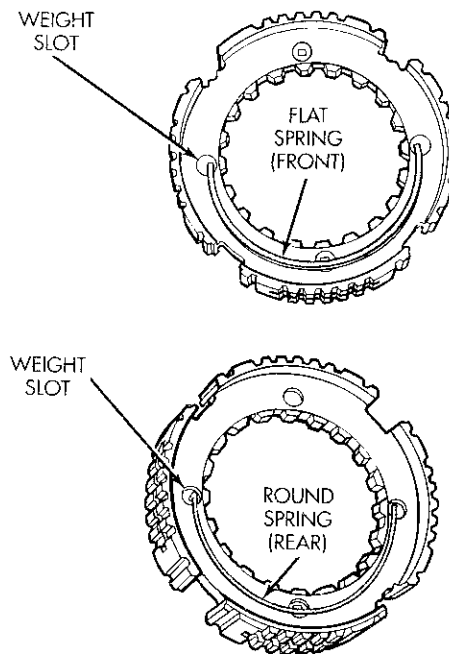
Installing Weight Retainer Springs In 1-2 Synchro Hub
